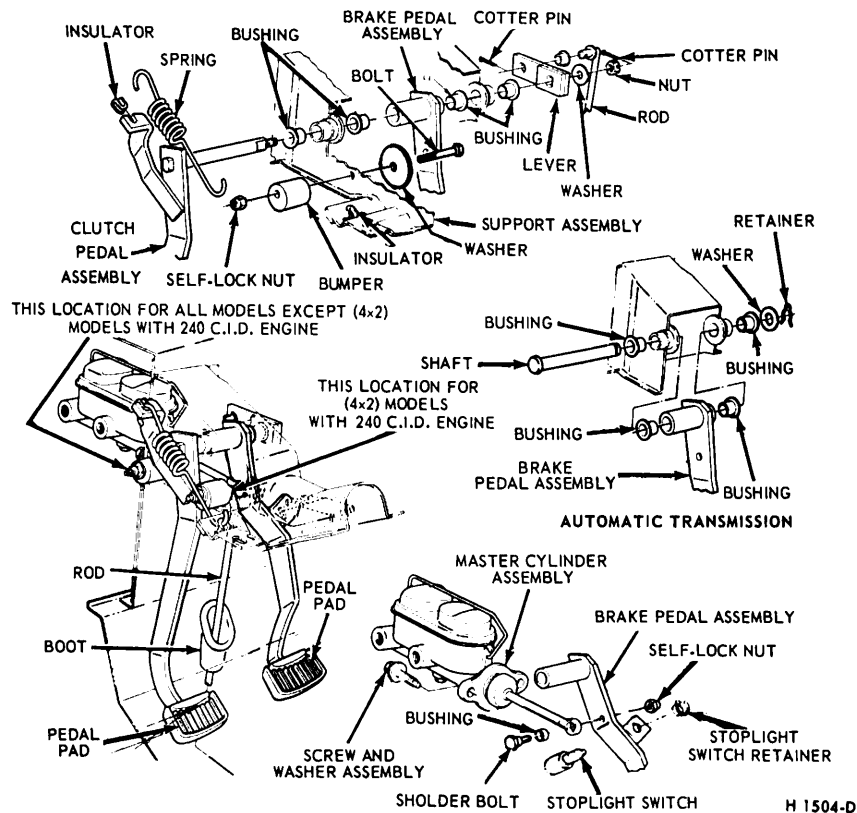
Dual Master Cylinder and Brake Pedal Installation—
